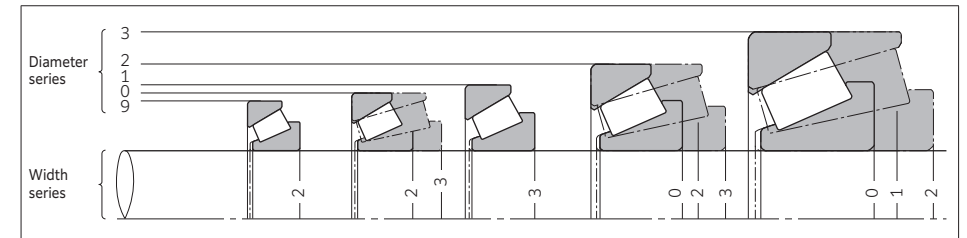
Dimension series for tapered roller bearings (based on JIS B 1534)
